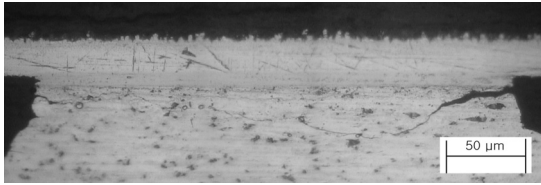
Cross-sectional micrograph of a solder ball with crack
